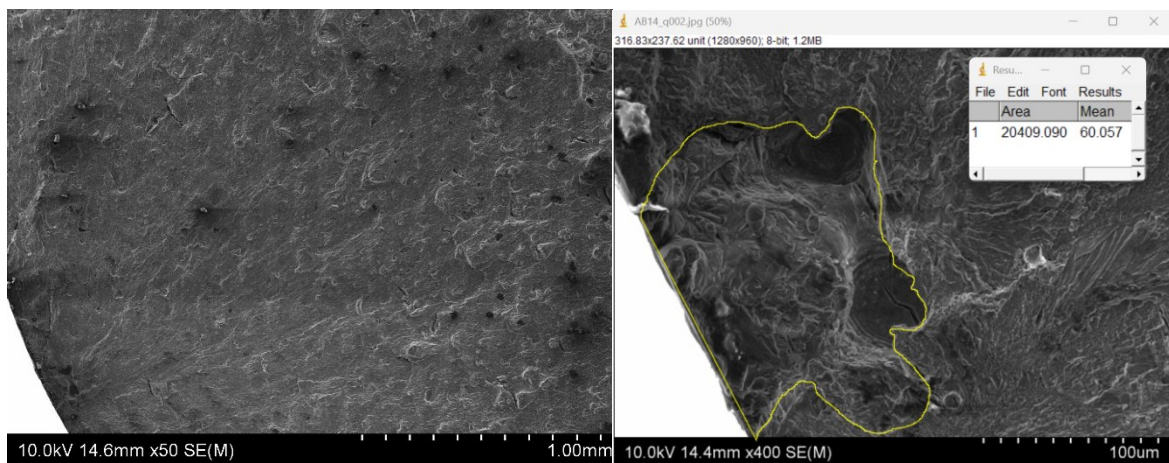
Fracture surface of sample CD_LBD-AB-4 a) x50, b) x300.
